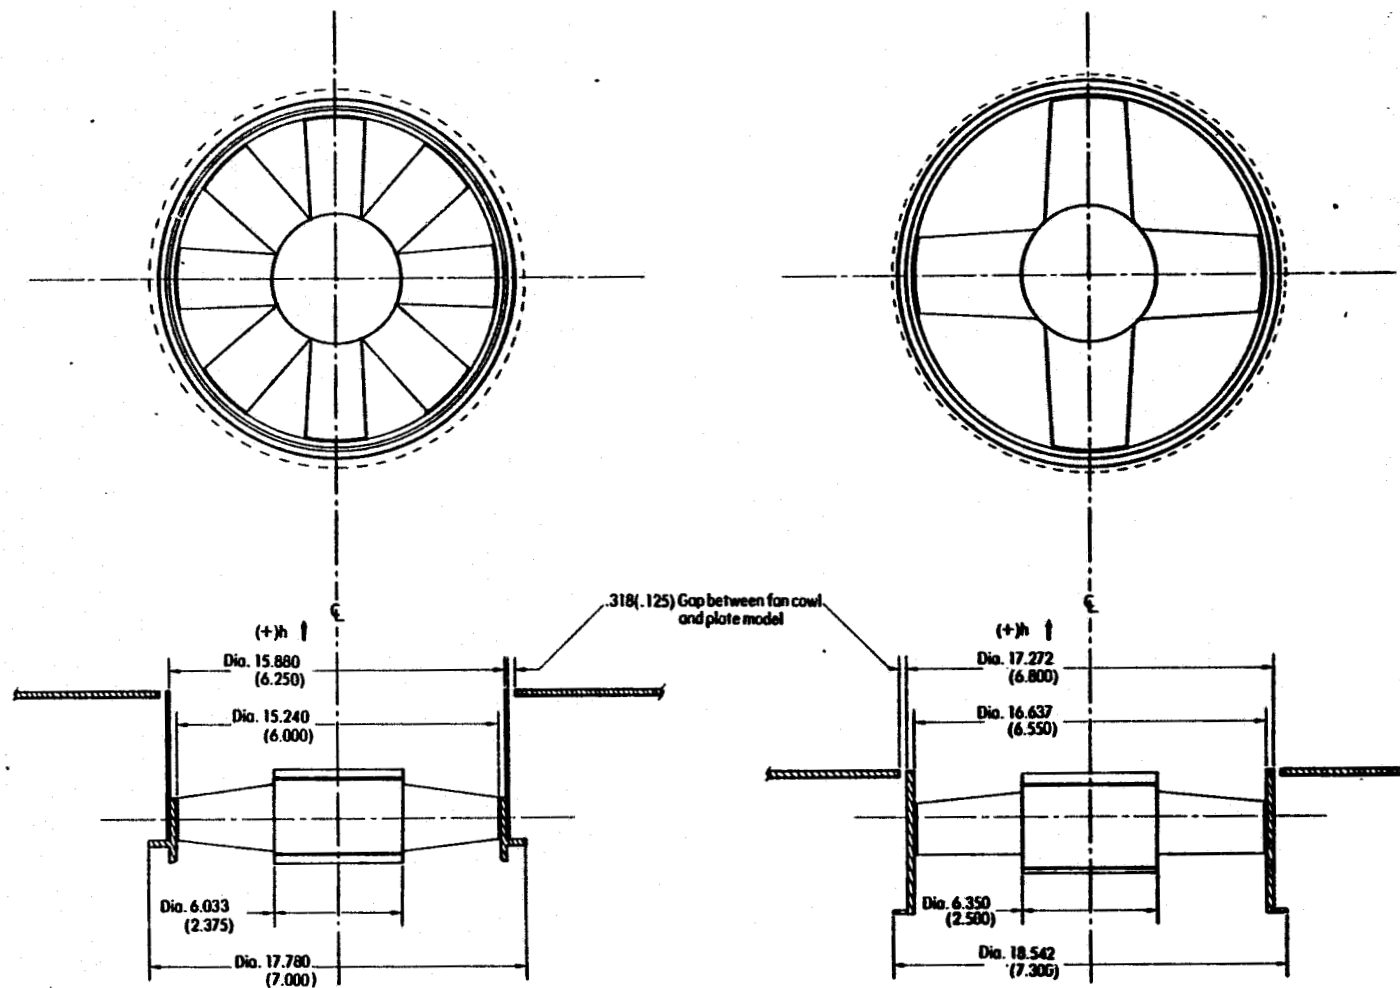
Tip driven fans, 4 and 8 blade shown in the plate model 1 configuration (without sleeve extensions). All dimensions are in cm (in.).
